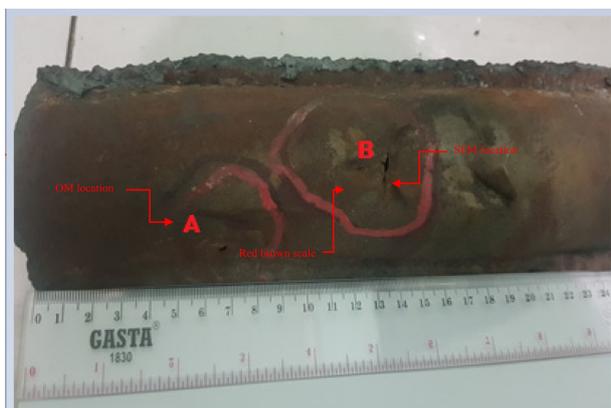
Photograph of the failed tube after removed from inside boiler.
